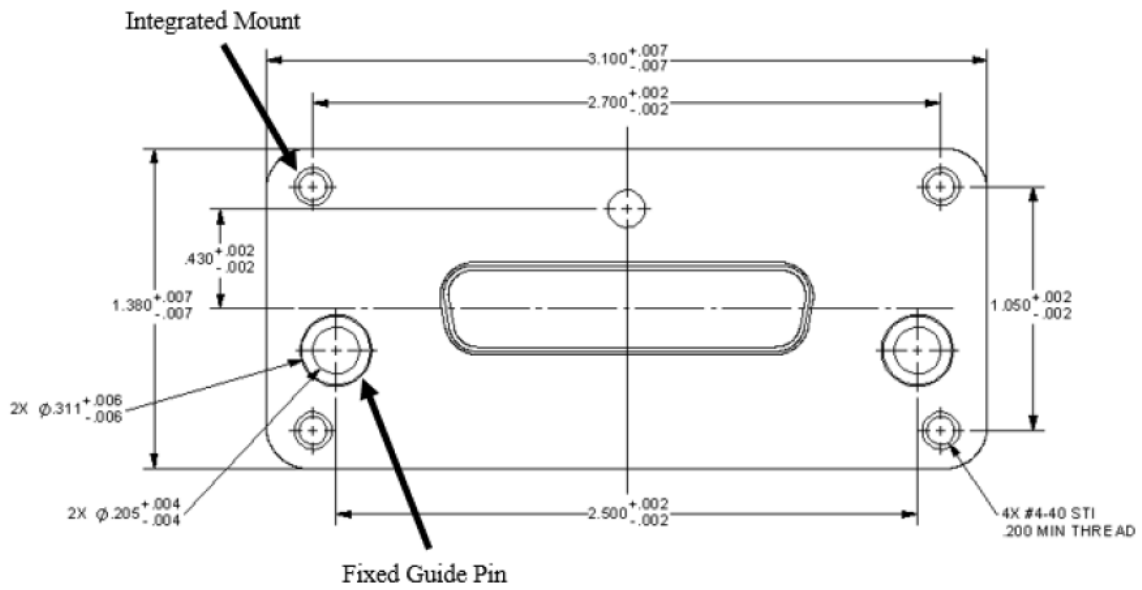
Front view of the SAV electrical connector, looking in the -X direction calling out the integrated mount and fixed guide pin features
